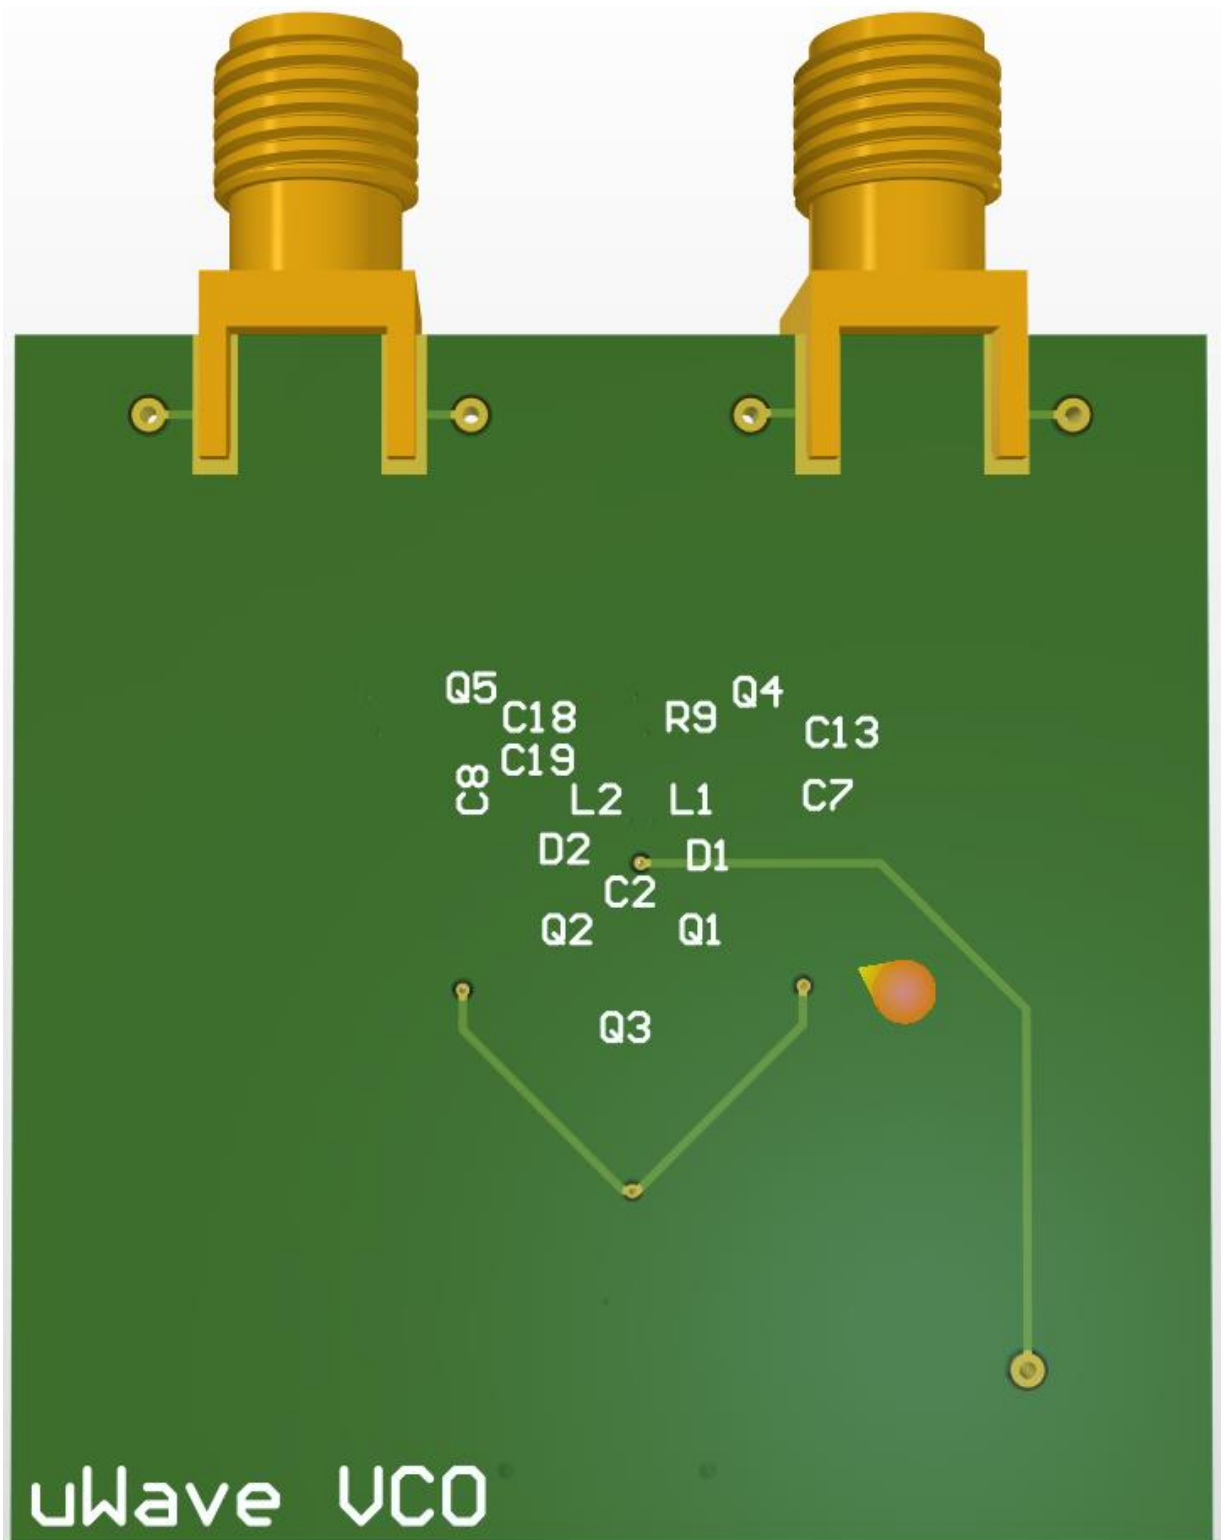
Final VCO Board Layout Design, 3D Bottom View
